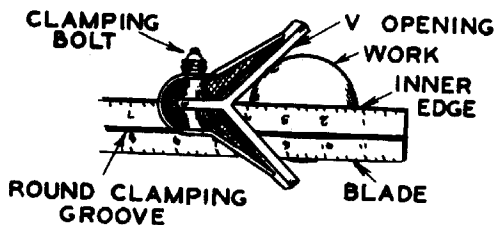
SCRIBING A CENTER LINE USING A CENTER HEAD
